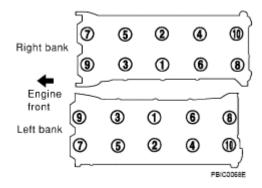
Identifying Cylinder Head Bolts Courtesy of NISSAN MOTOR CO., U.S.A.
